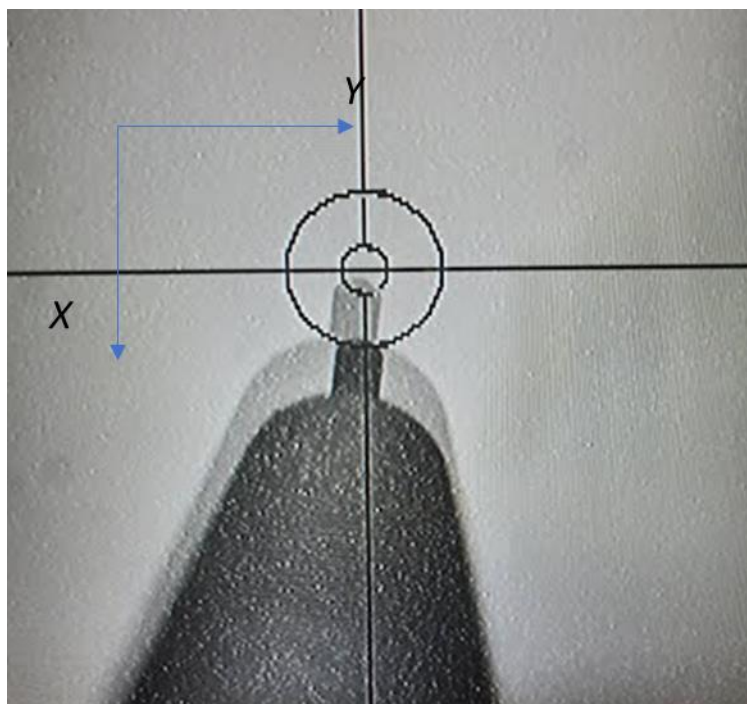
Image of the new wire feeder showing a tilted angle with respect to the welding direction (positive direction along X-axis)
